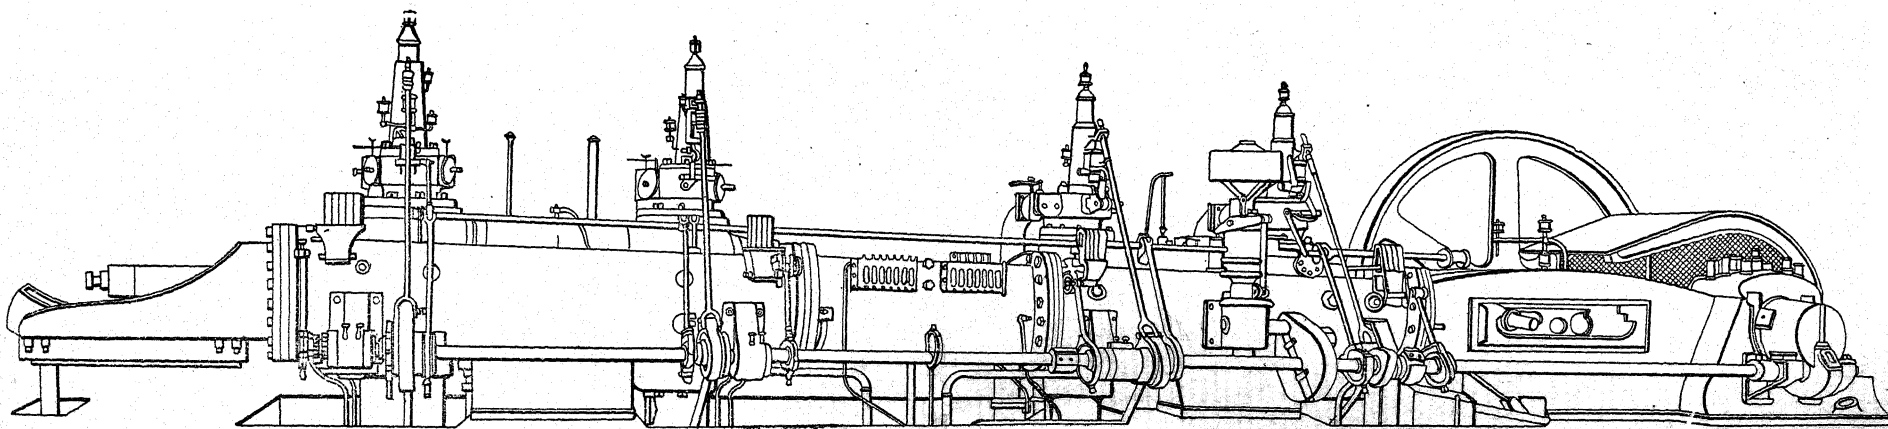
COCKERILL TANDEM CYLINDER ENGINE,
